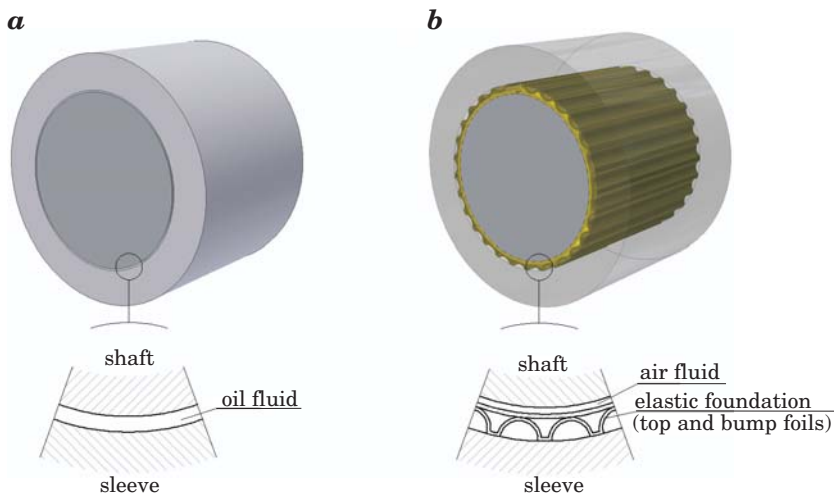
Comparison of the operating principles of a liquid-lubricated journal bearing and a gas foil bearing
